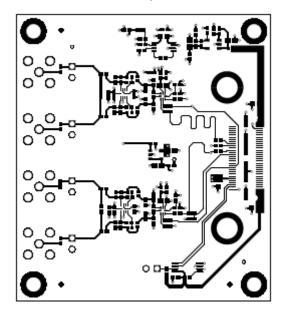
ADS7057EVM PCB Layer 1: Top Layer
